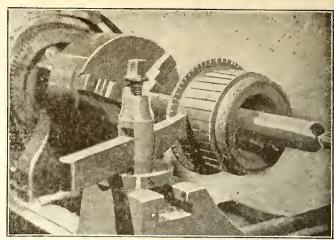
Turning a Commutator with a Diamond Point Tool in the Lathe-
